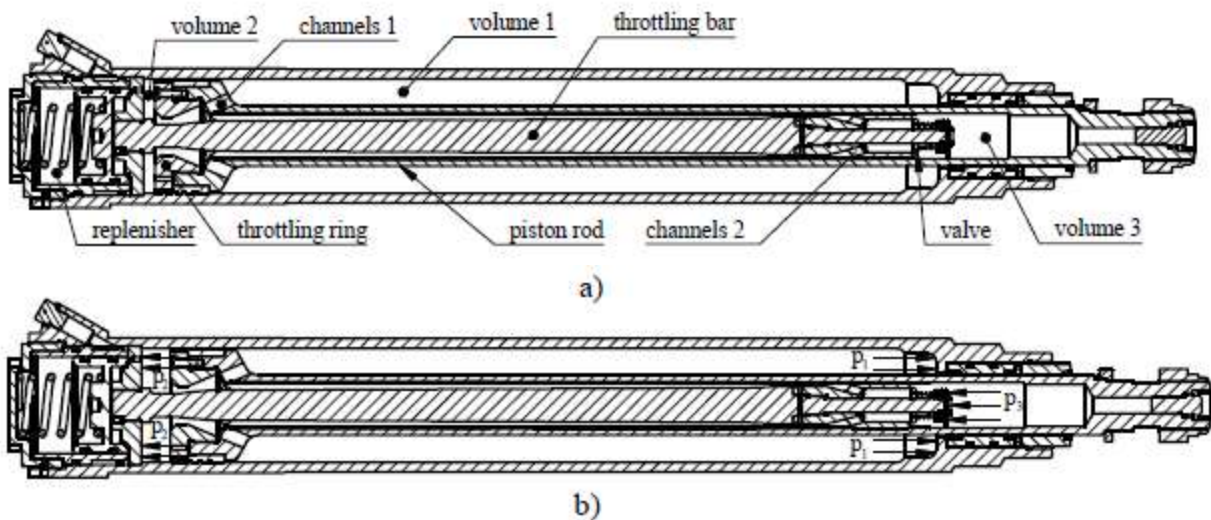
Hydraulic brake: a) main parts of the hydraulic brake
